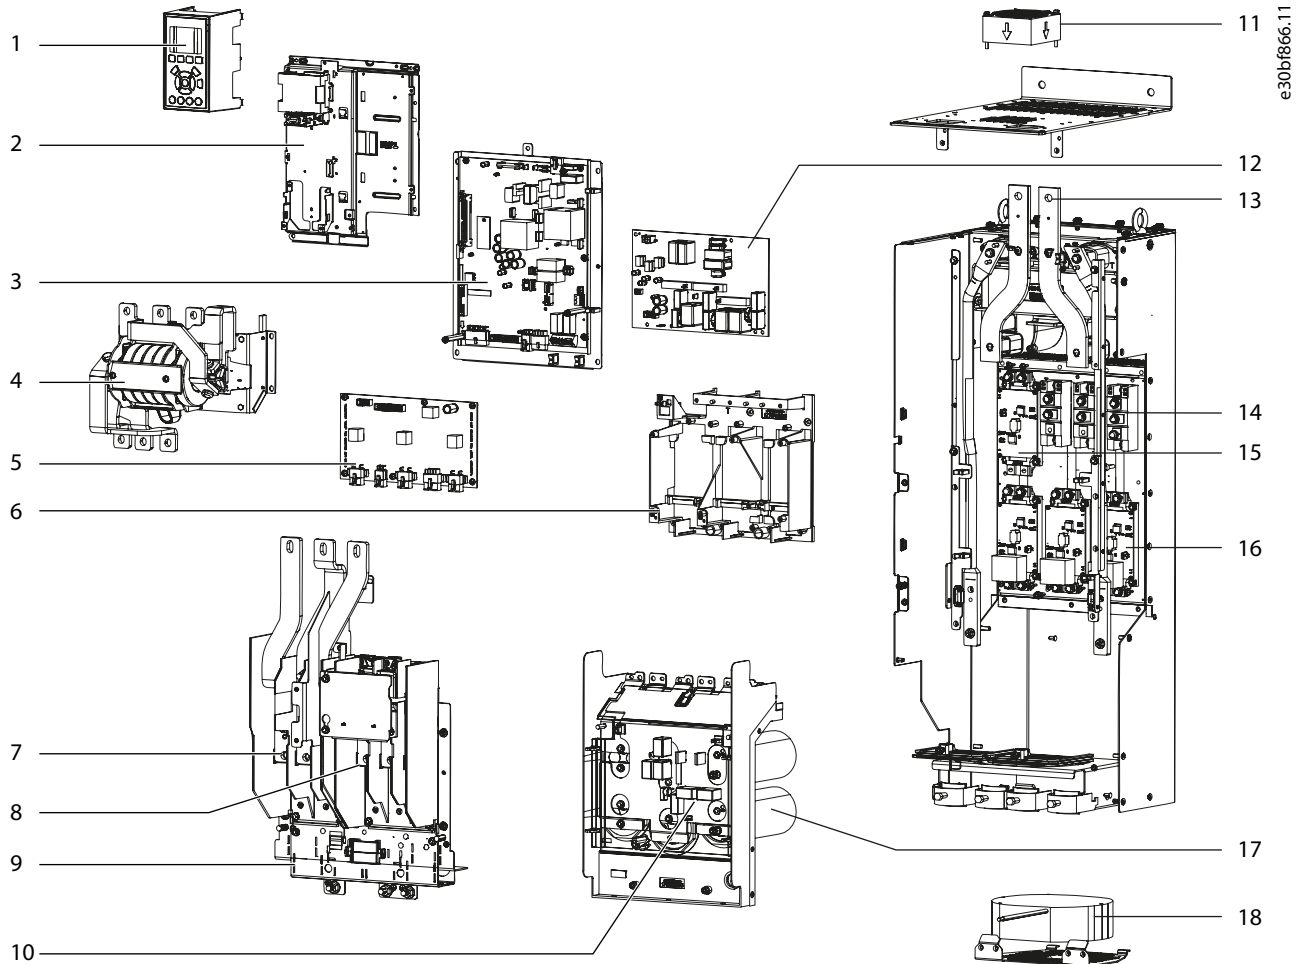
Exploded View of D3h Drive (D1h/D5h/D6h are similar)
